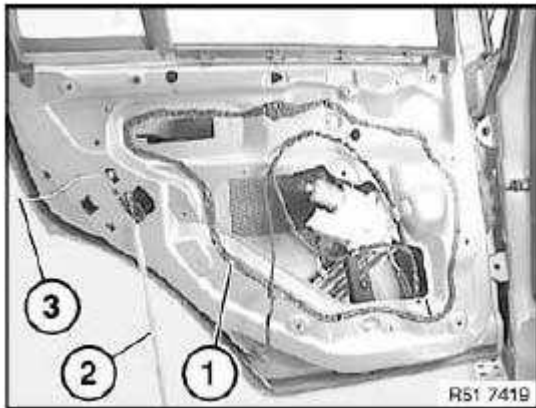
Bowden Cable, Butylene Tape And Lock Knob Control Rod
